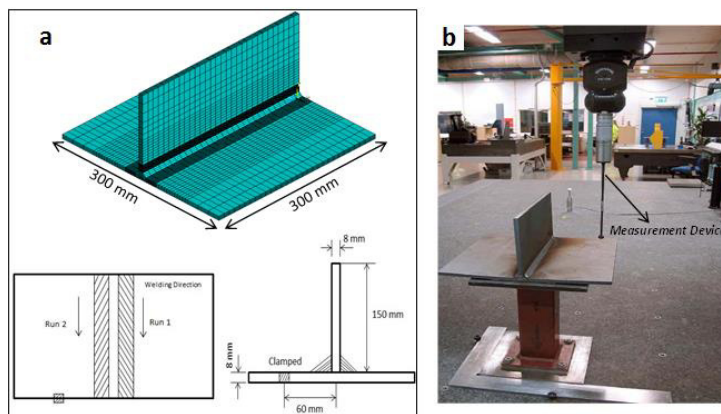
(a) T-Fillet joint, geometry and mesh; (b) experimental set up and measurement.
